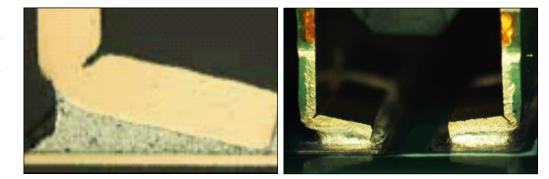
(left) Cross-sectional view of an acceptable J-lead solder joint
